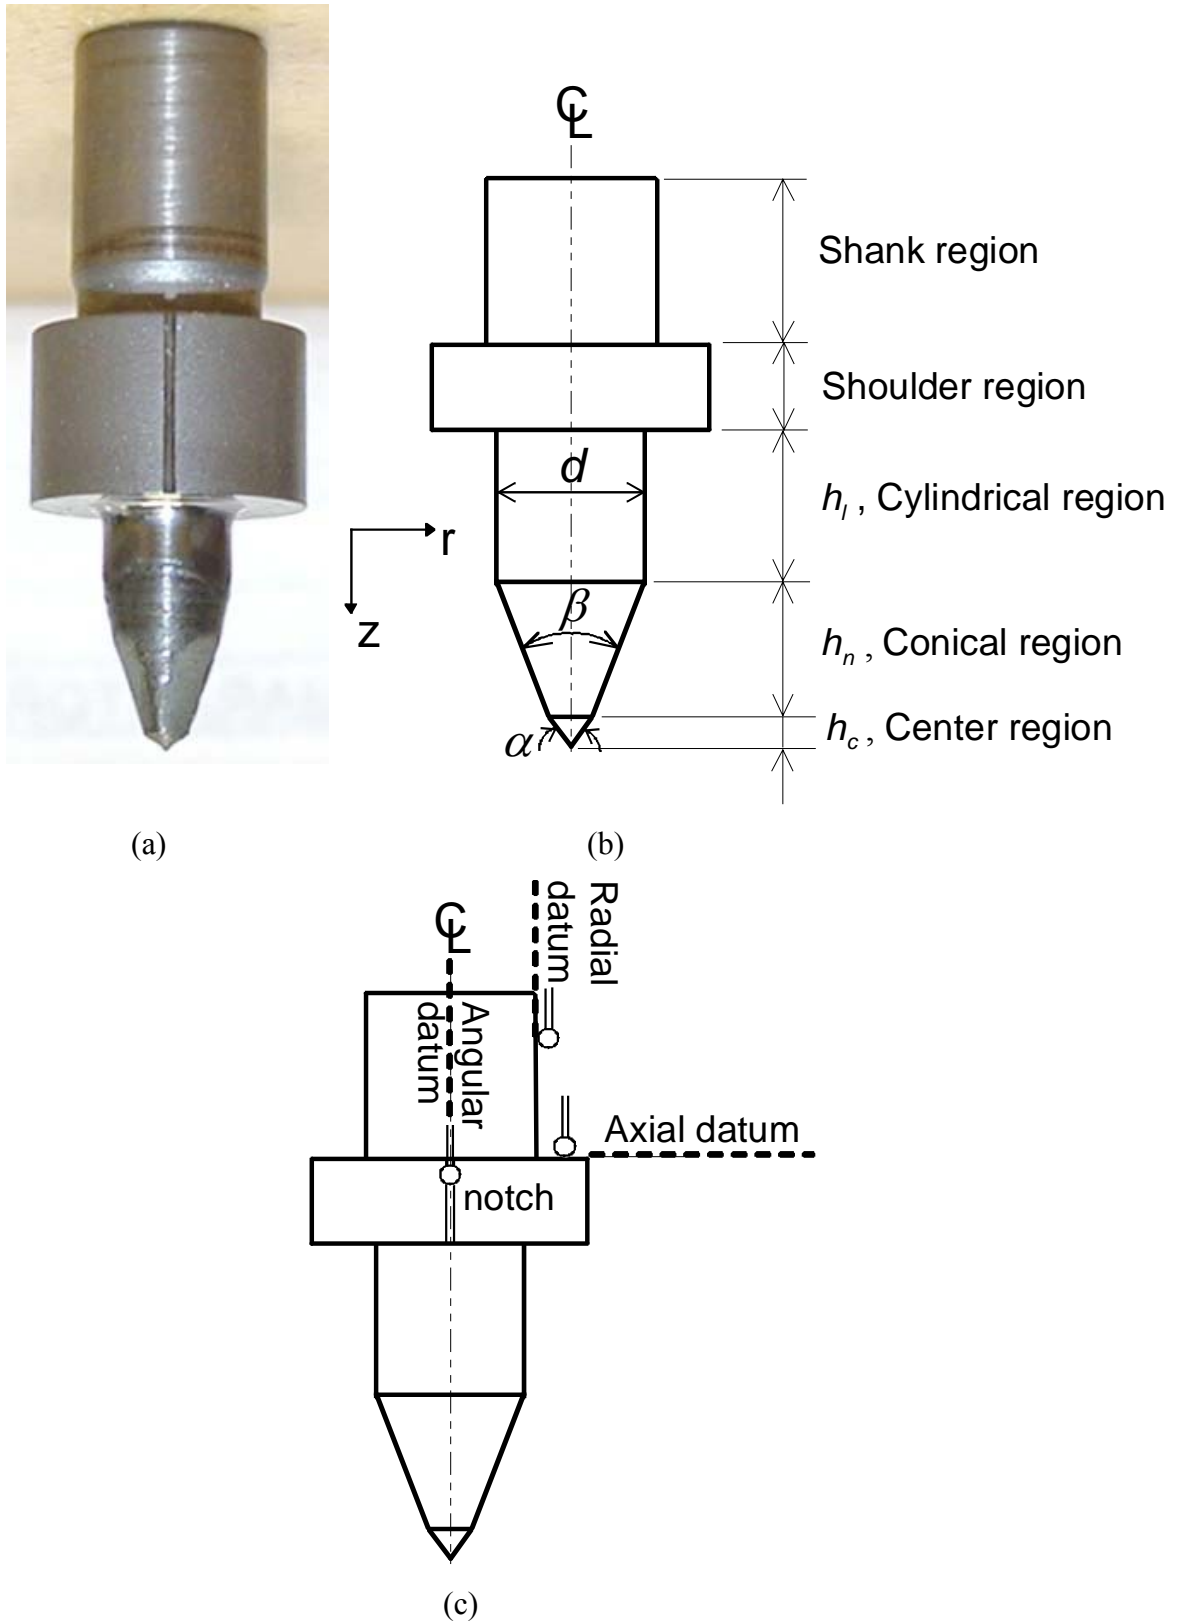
Friction drill tool: (a) picture of the tool, (b) illustration of regions in the tool and key dimensional parameters, and (c) three reference datum for CMM measurement.
